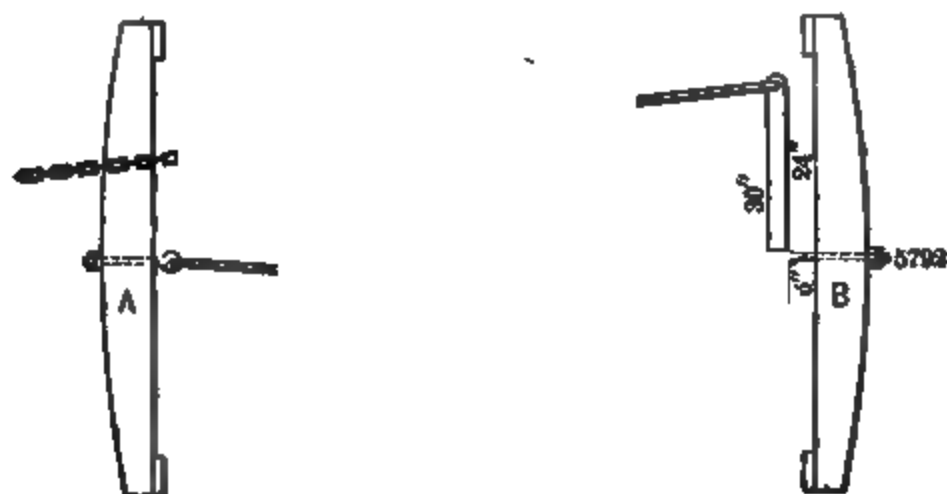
SKETCH OF MECHANISM OF HAND-BRAKE.
